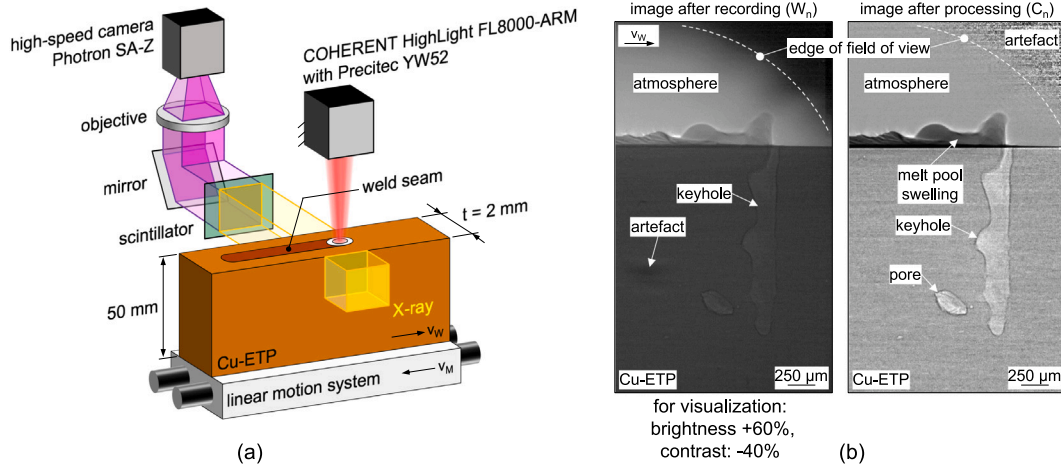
(a) Experimental setup of welding probe and X-ray imaging, b) recorded images before and after image processing.
